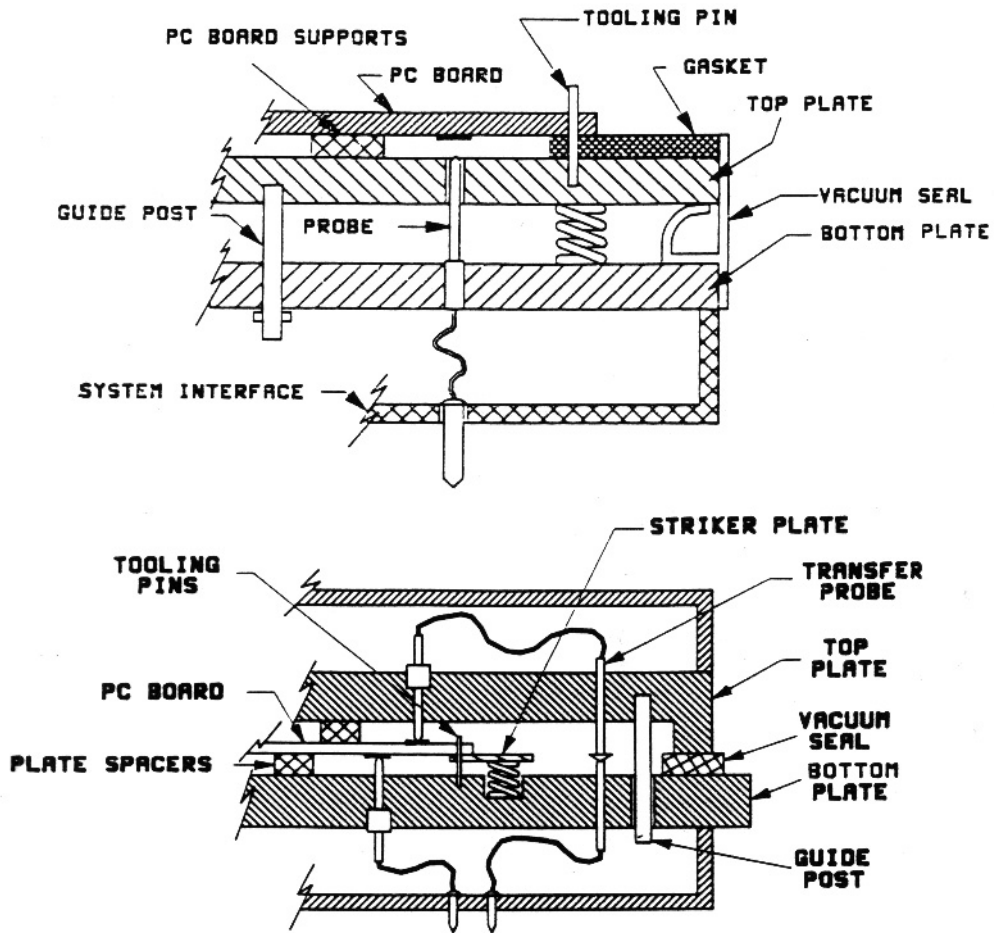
a) Detail of single sided test fixture, b) double sided fixture.
